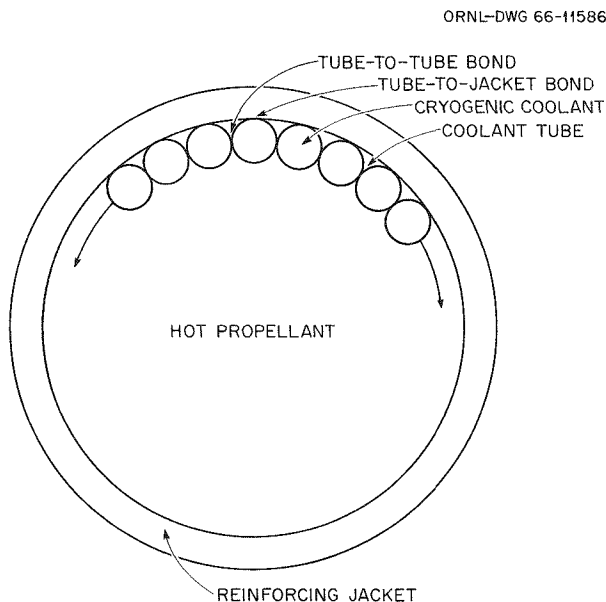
Typical Cross Section of a Cryogenically Cooled Rocket Nozzle.
